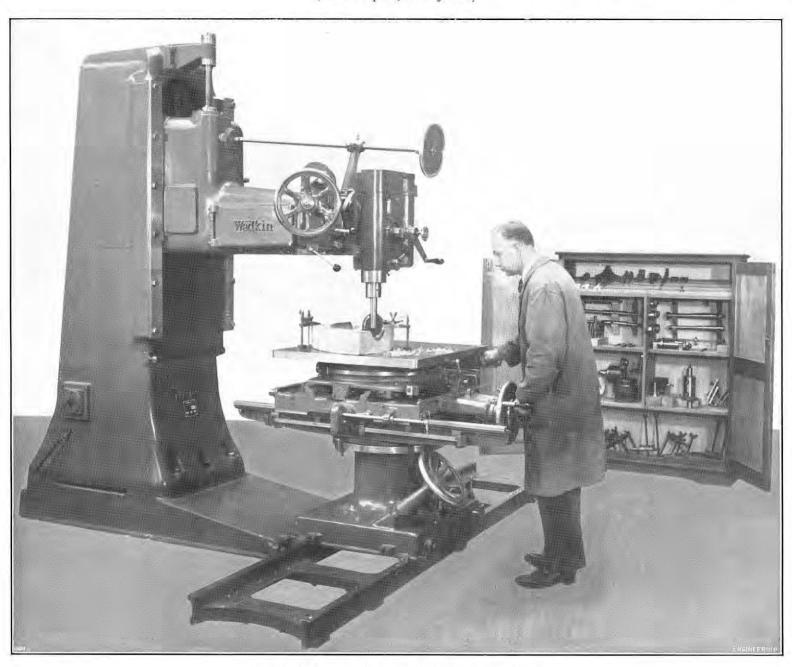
Universal Pattern Miller; Wadkin, Ltd.
